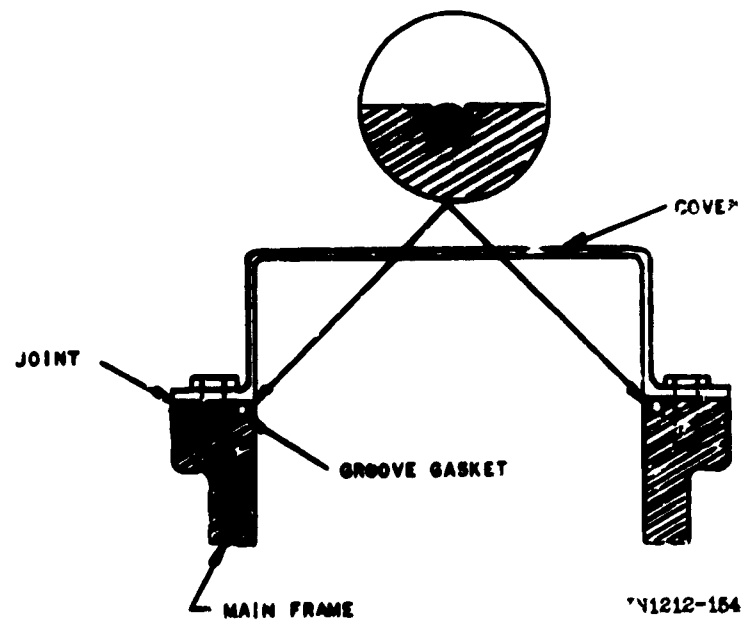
Flat-Flange Type Joint With Groove Gasket
